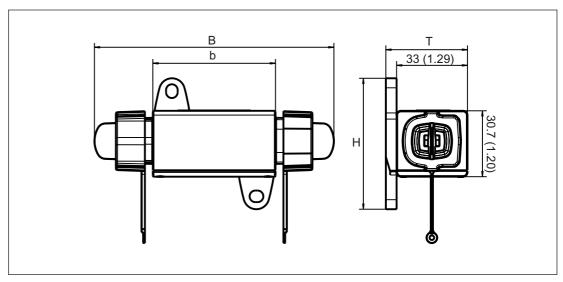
Dimension drawing, DRIVE-CLiQ coupling
